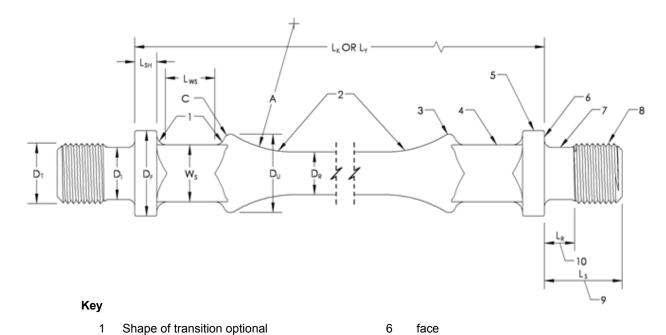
Steel Sucker Rod and Pony Rod Illustration
